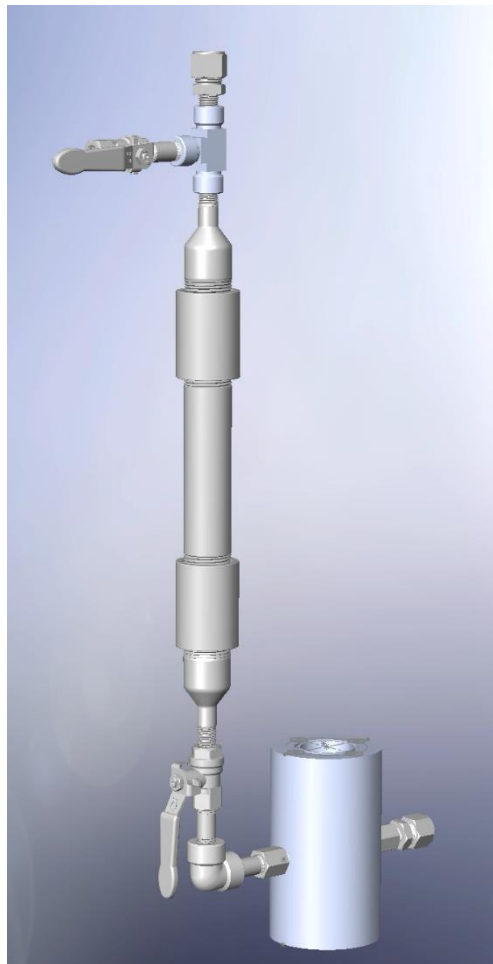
CAD model of fluid reservoir and sample chamber assembly
